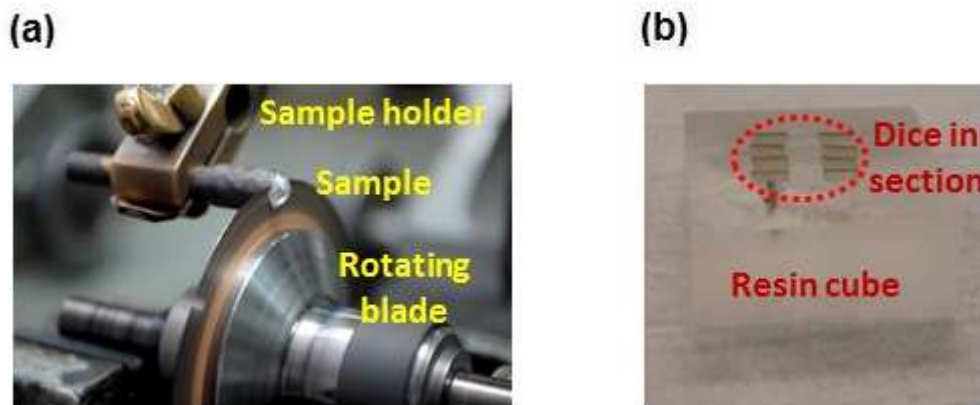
(a) Oil-lubricated rotating blade; (b) resin sample after cutting.
